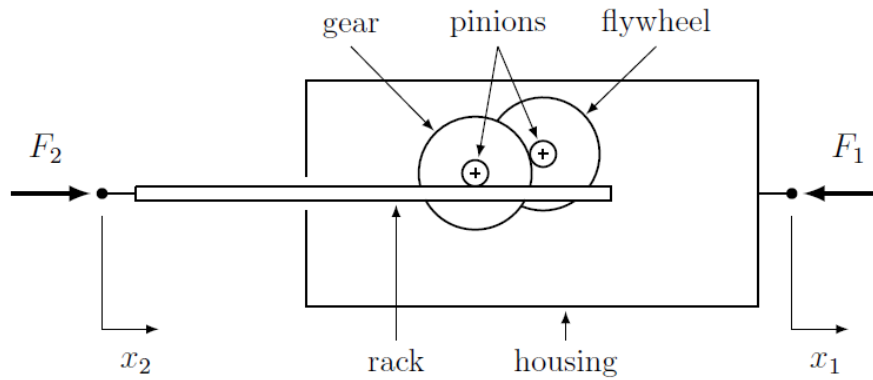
A schematic diagram of the classical inerter – A flywheel gear mechanism [35]
